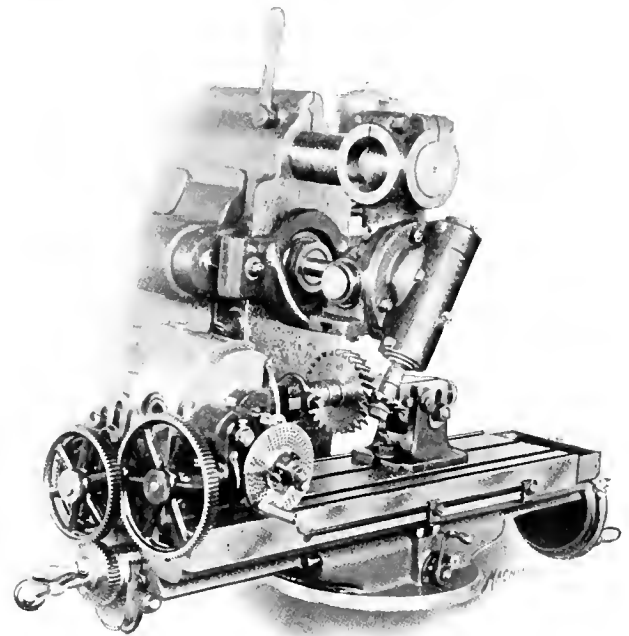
Cutting Spiral Gears of Helix Angle too Great to Allow the Method of Fig. 81, employing the Brown & Sharpe Vertical Milling Attachment.
